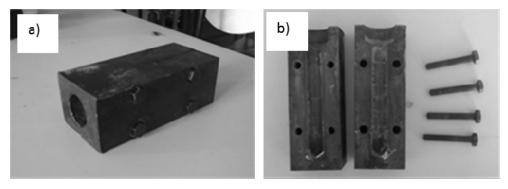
Mold for tensile test pieces before casting (a) and dismantled (b)
